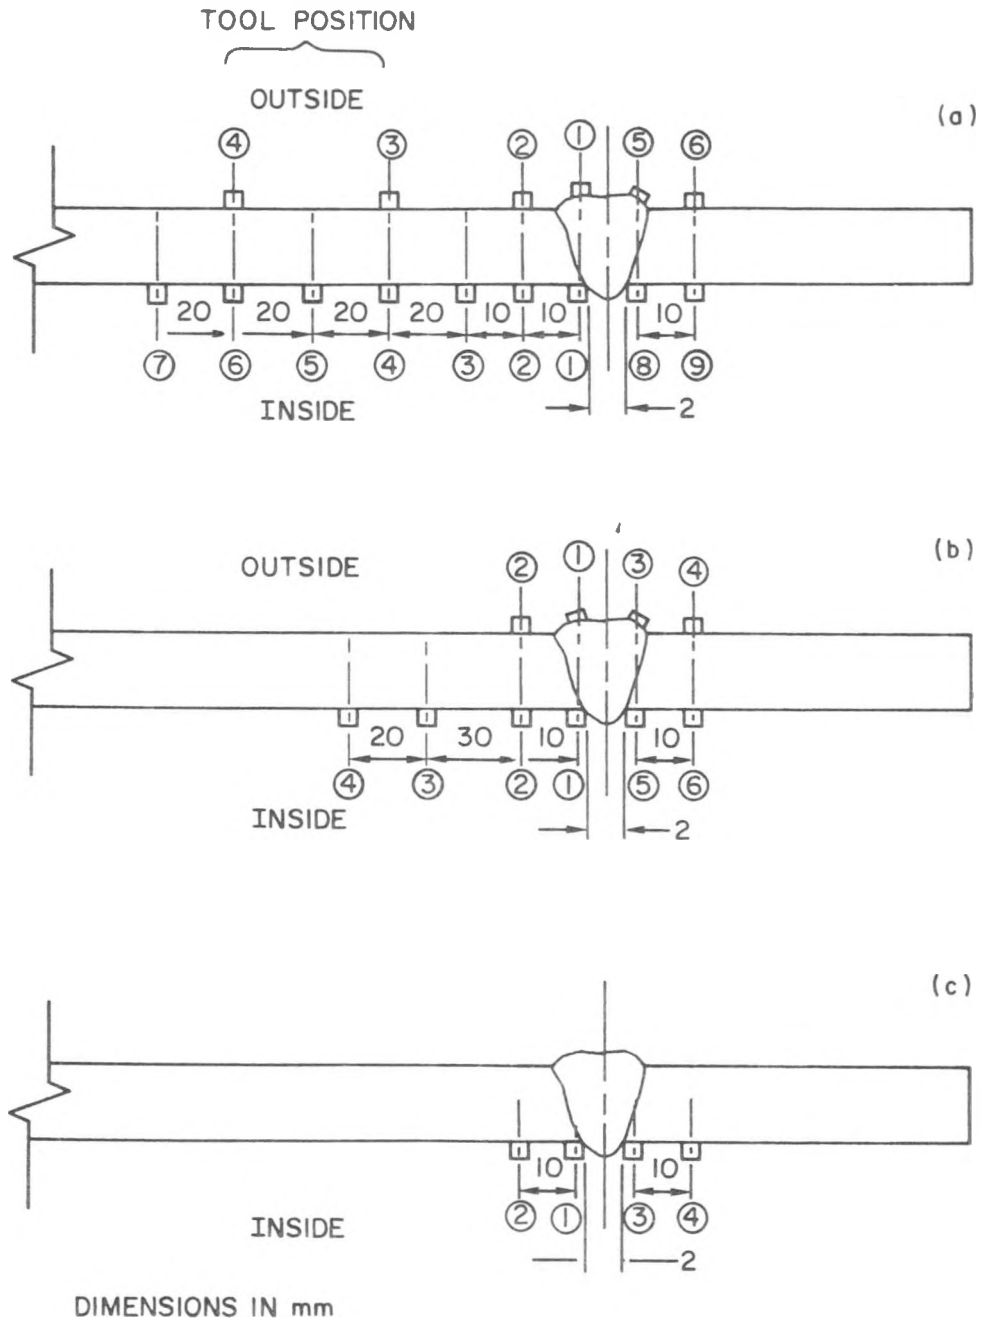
Strain Gage Locations on the 12-in.-diameter MSIP Weldment. (a) 0° Azimuth Upper MSIP-treated Weld, (b) 90° Azimuth Upper MSIP-treated Weld, (c) 0° Azimuth Untreated Lower Weld.
